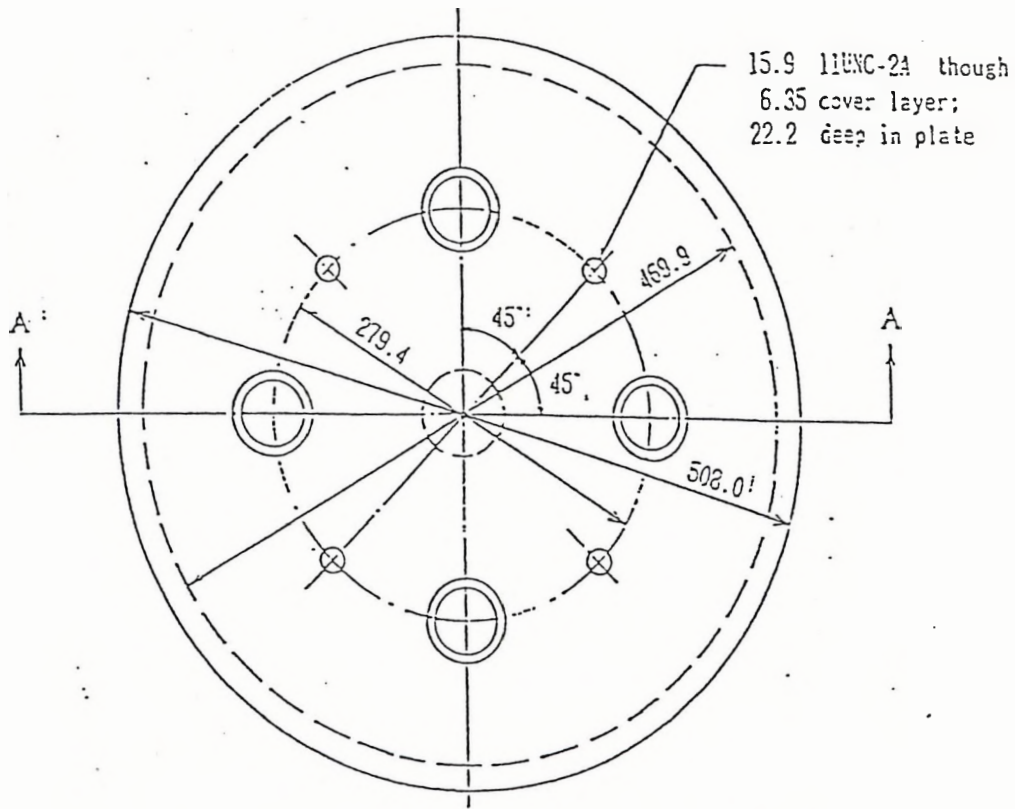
Bearing Configuration and Dimensions (unit: mm)
